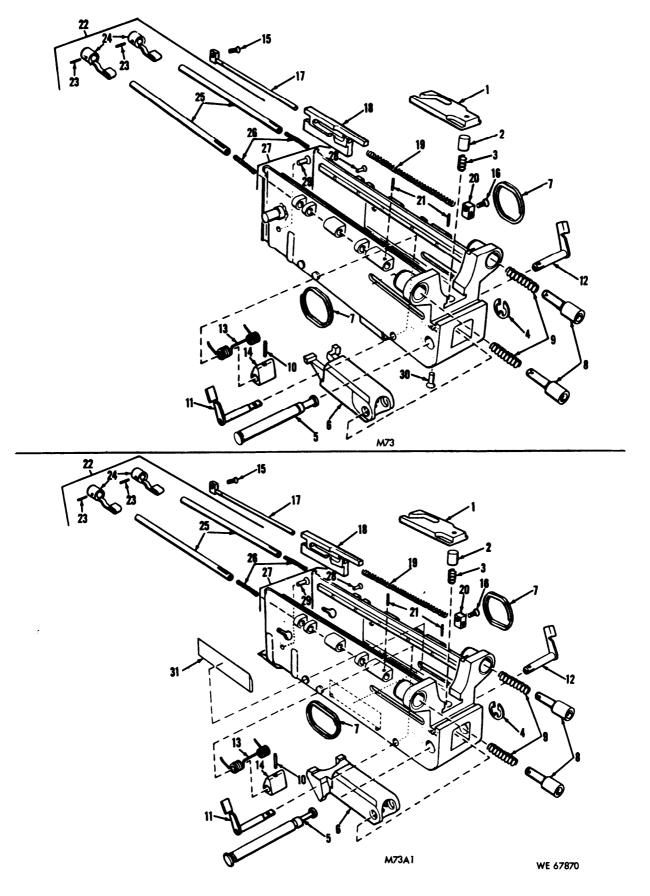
Receiver assembly (M73 and M73A1 only)—exploded view.
